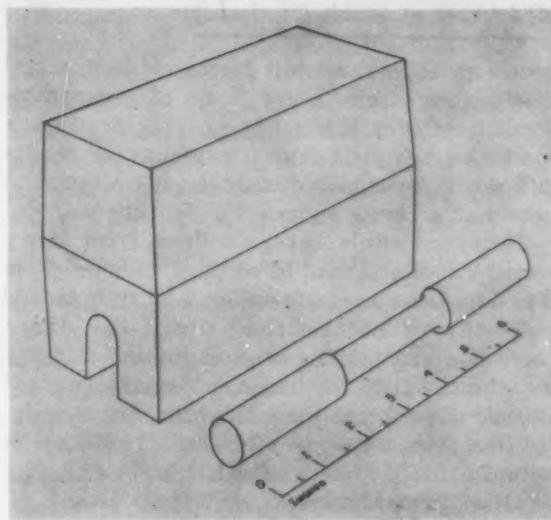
Typical keel block specimen compared with ASTM A47-48 0.625-in. diam cast tensile specimen. The latter is more representative of malleable castings than the larger keel blocks generally used for nodular iron.
